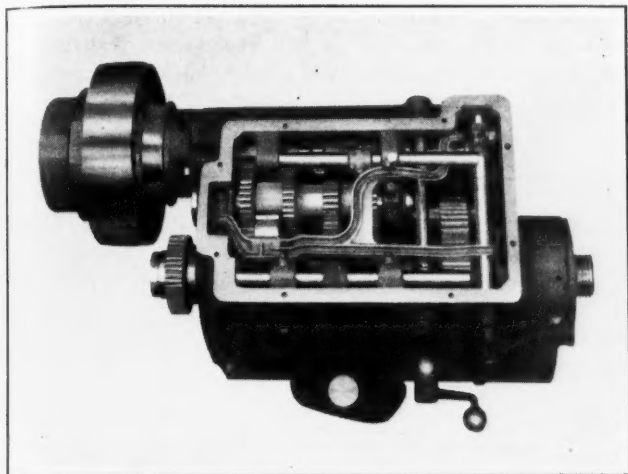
View showing the Arrangement of the Mechanism in Geared Headstock
